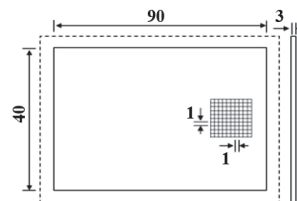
Dimensions of specimen for salt spray test (unit: mm)
